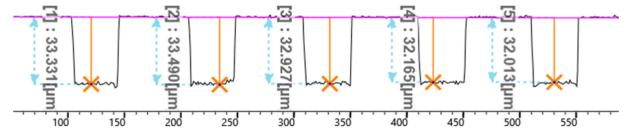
Surface profile of micro grooves machined on tungsten carbide
